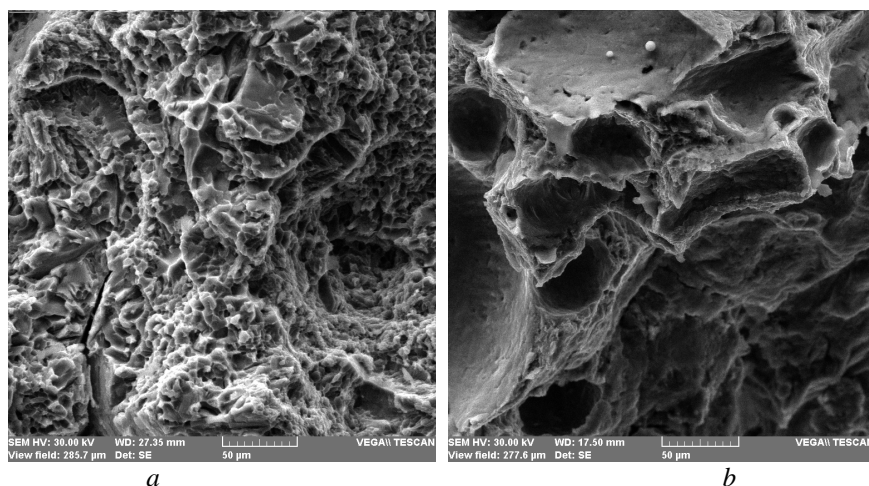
SEM images of the fractured surfaces: *a* – unwelded metal; *b* – weld.
